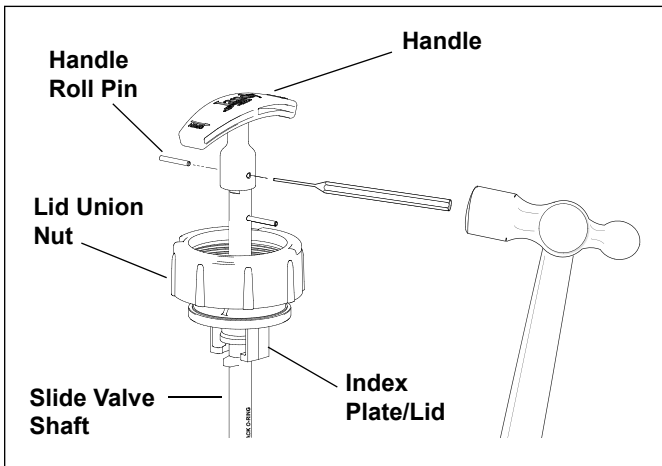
Remove Handle Roll Pin - Top Half of Slide Valve Shaft Shown
